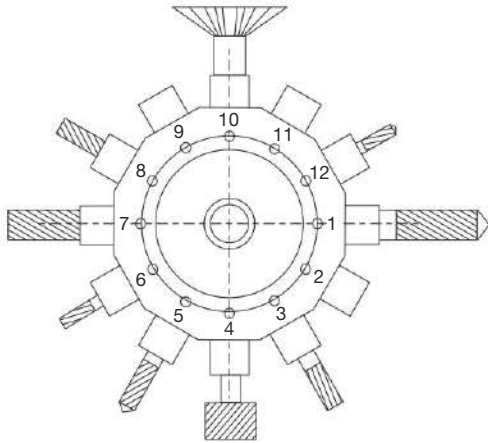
Typical tool turret used in CNC drilling/milling machines
